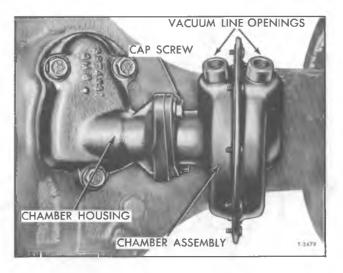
Two-Speed Axle Vacuum Shift Chamber Installed (Corporation Axle)
